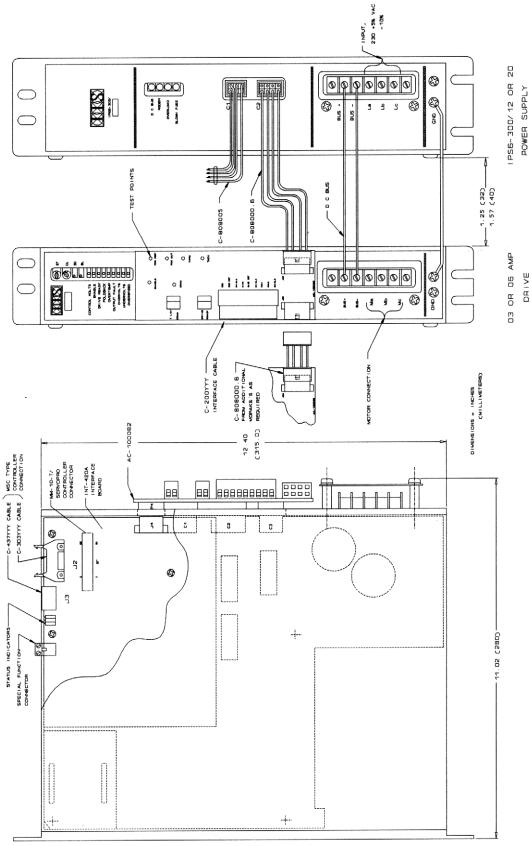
Typical Installation Drawing for 03 or 06 Amp BSD6 Drives
